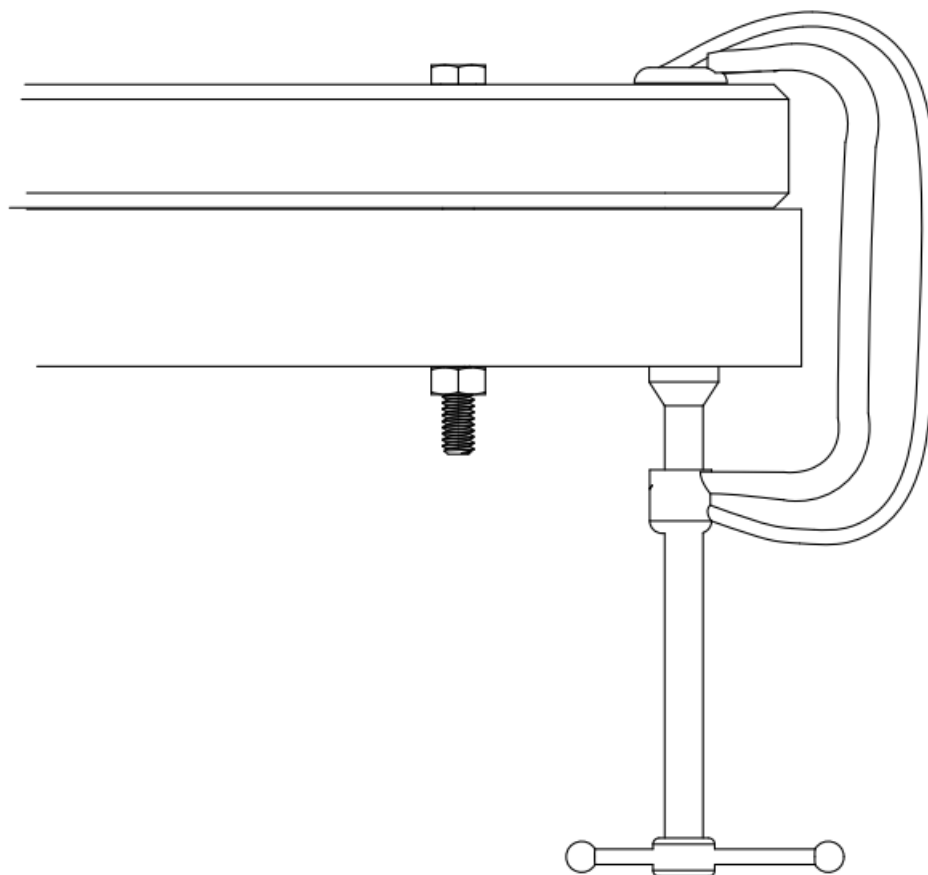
Position of the holes in the Materials Testing Machine's base.
